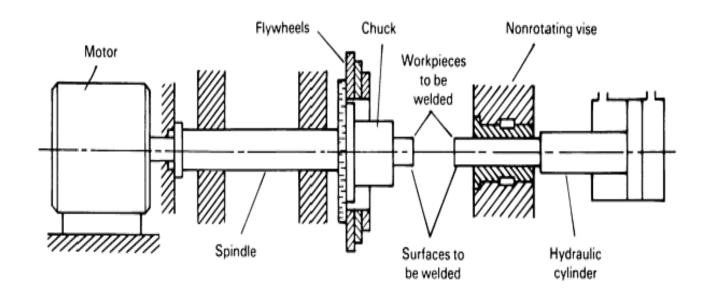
Schematic showing relation of workpieces to key components of an Inertia-Drive FRW System.
